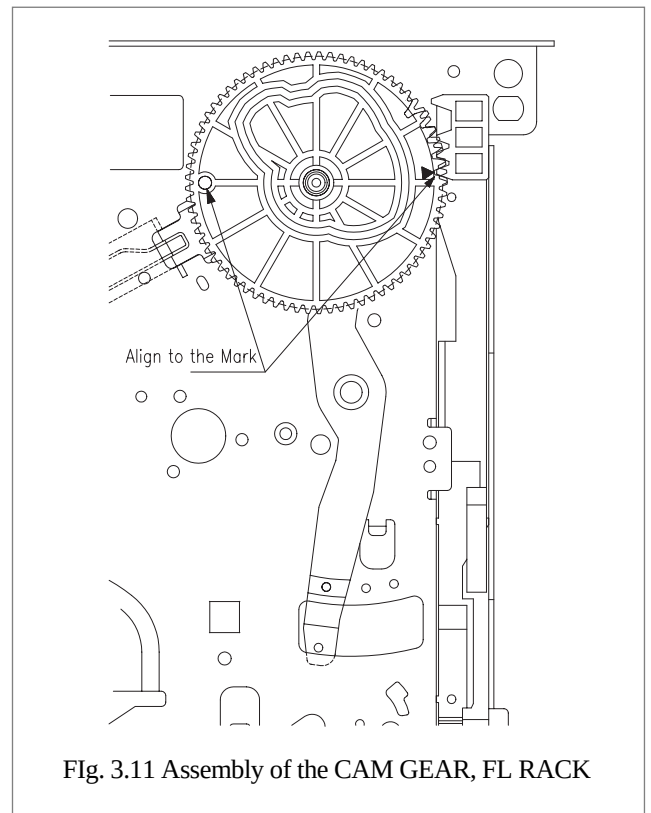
Assembly of the CAM GEAR, FL RACK
